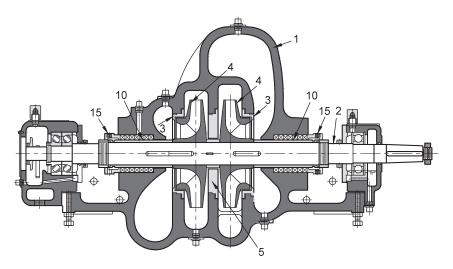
Section of a two-stage centrifugal pump (numbers refer to parts listed in Table 3.14). Courtesy of Hydraulic Institute and Worthington Corporation.
